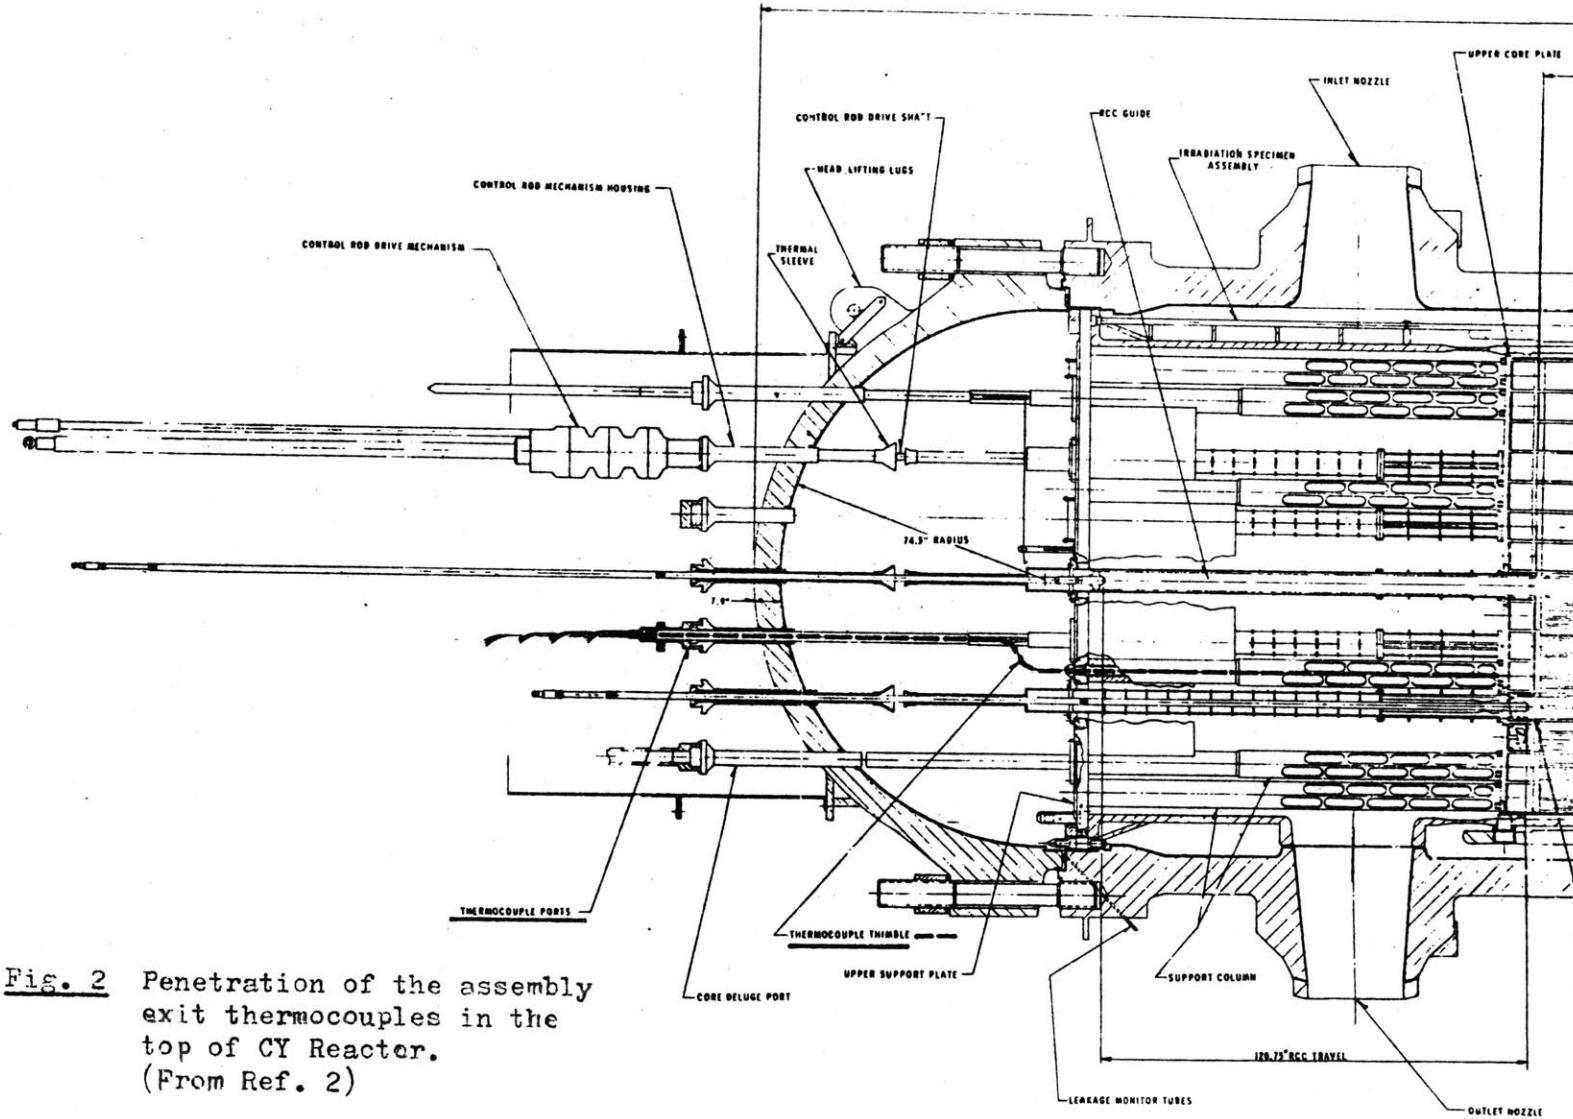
Penetration of the assembly exit thermocouples in the top of CY Reactor.
